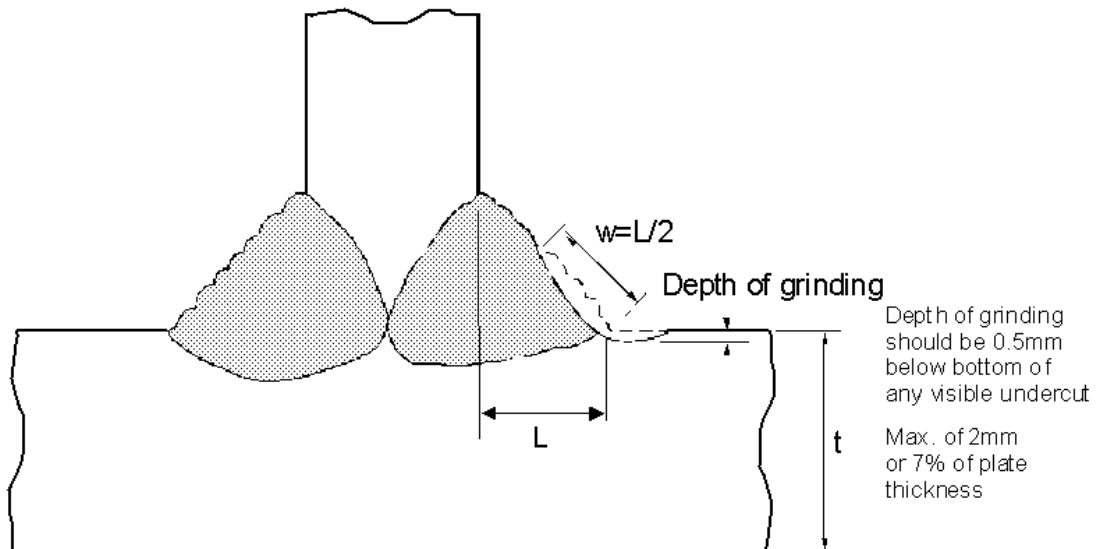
The burr grinding technique, showing depth and width of groove in stressed plate.
